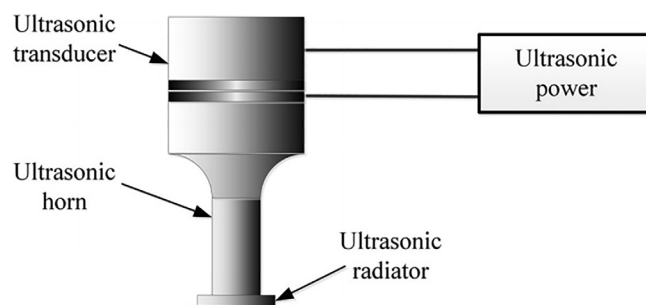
Schematic diagram of the ultrasonic transducer for gas tungsten arc welding (GTAW) [77].
